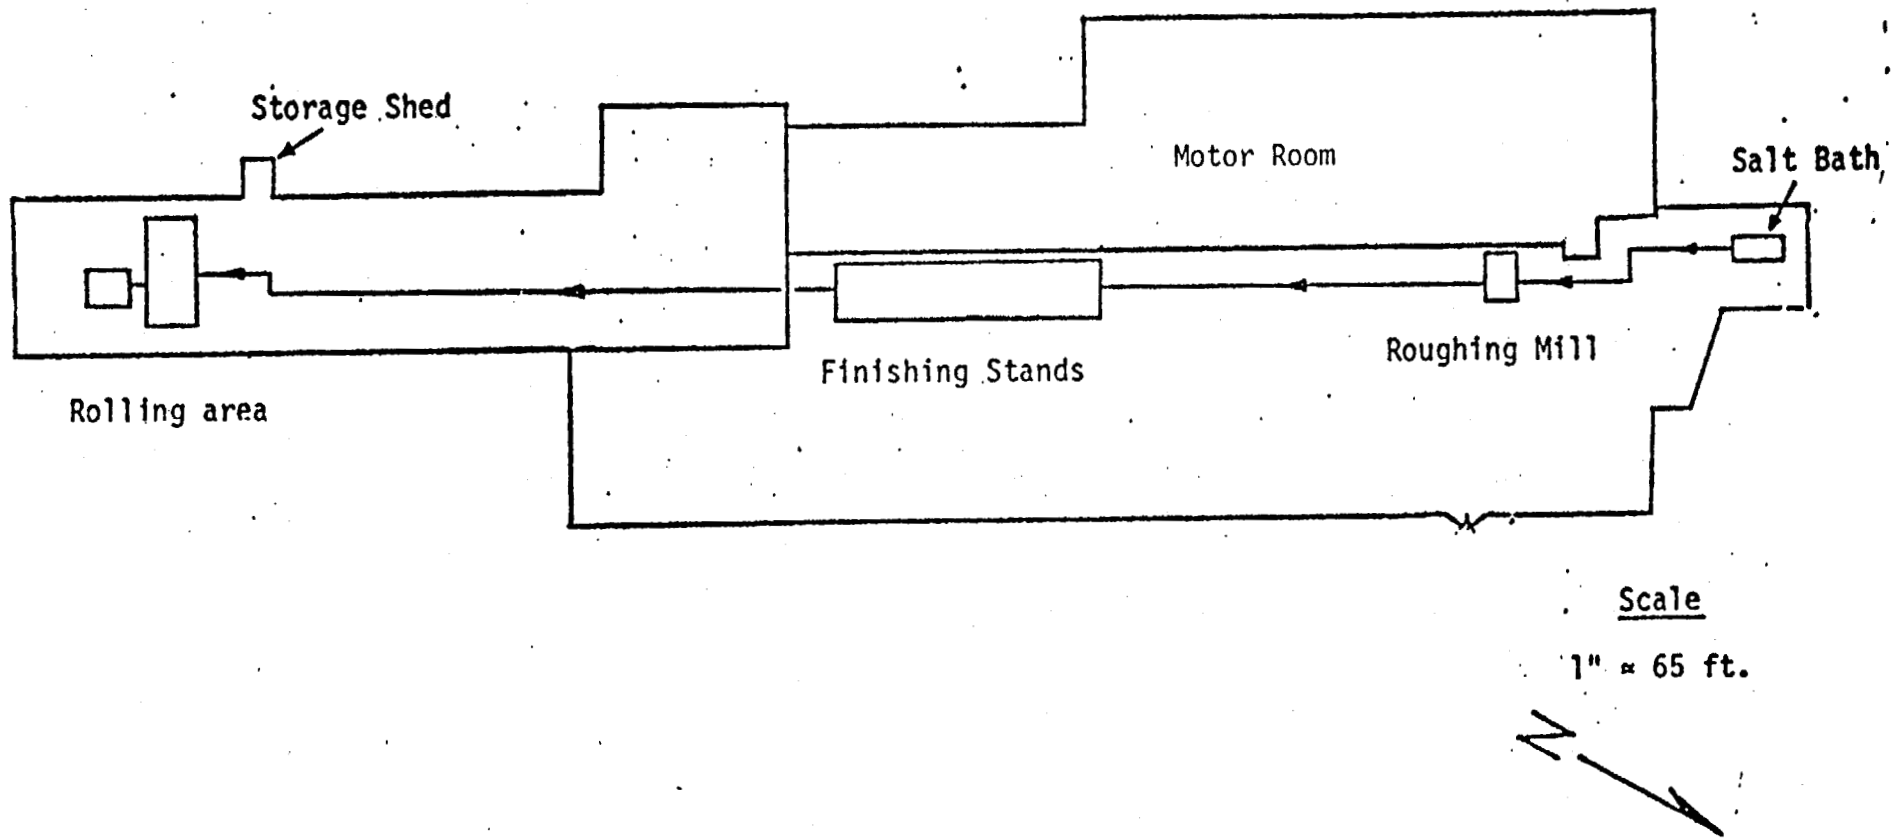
Layout of former Superior Steel Facility, showing approximate locations of process line machinery.
